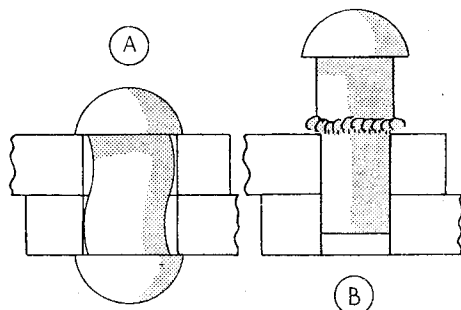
Rivet holes: "A"—hole too large; "B"—hole too small
